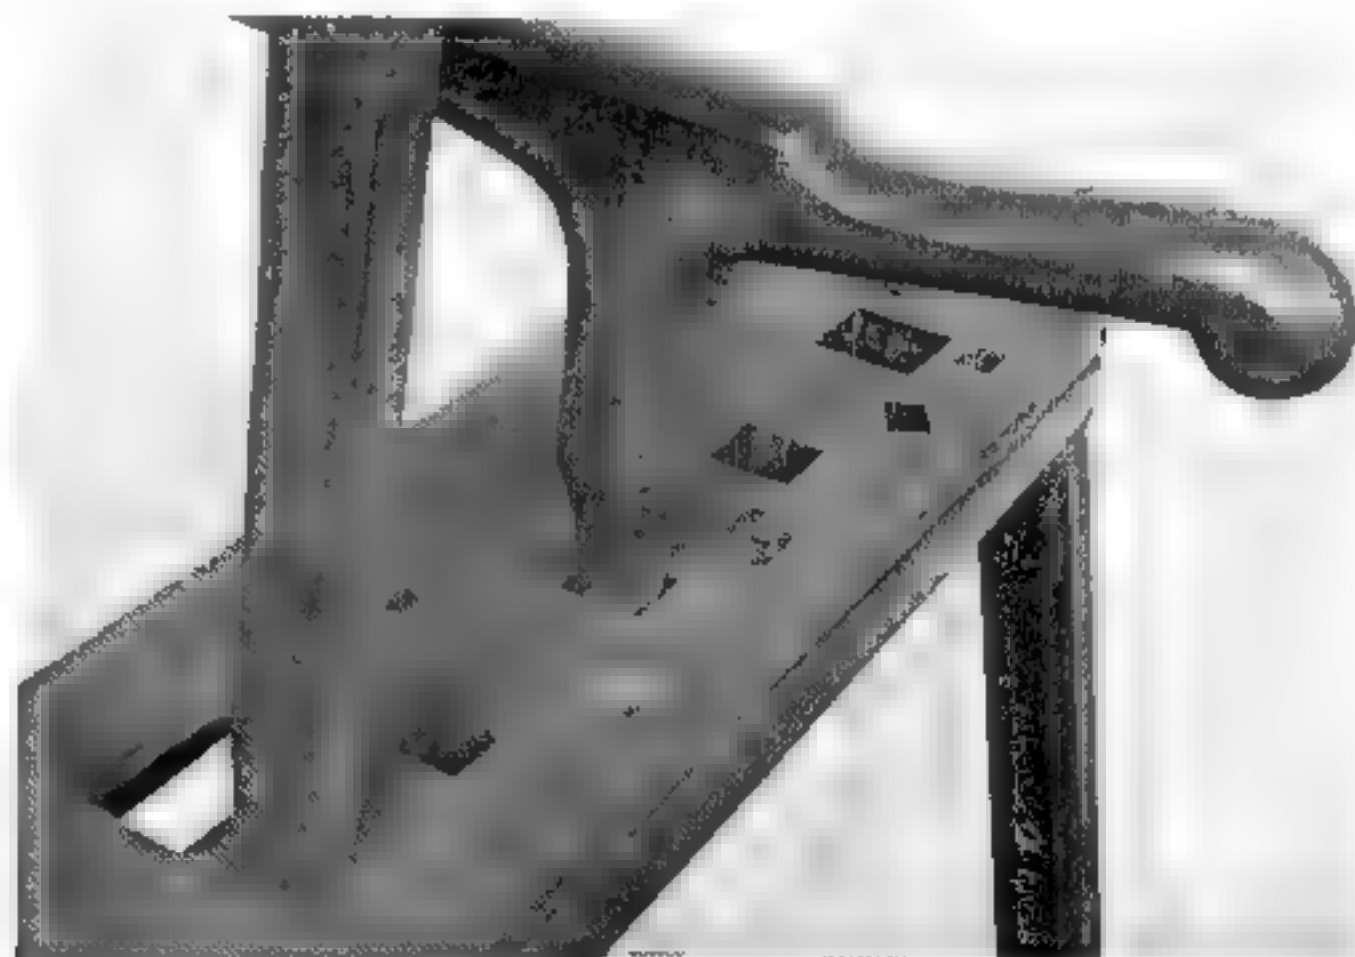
A stake plate, securely mounted, provides a stable forming platform
